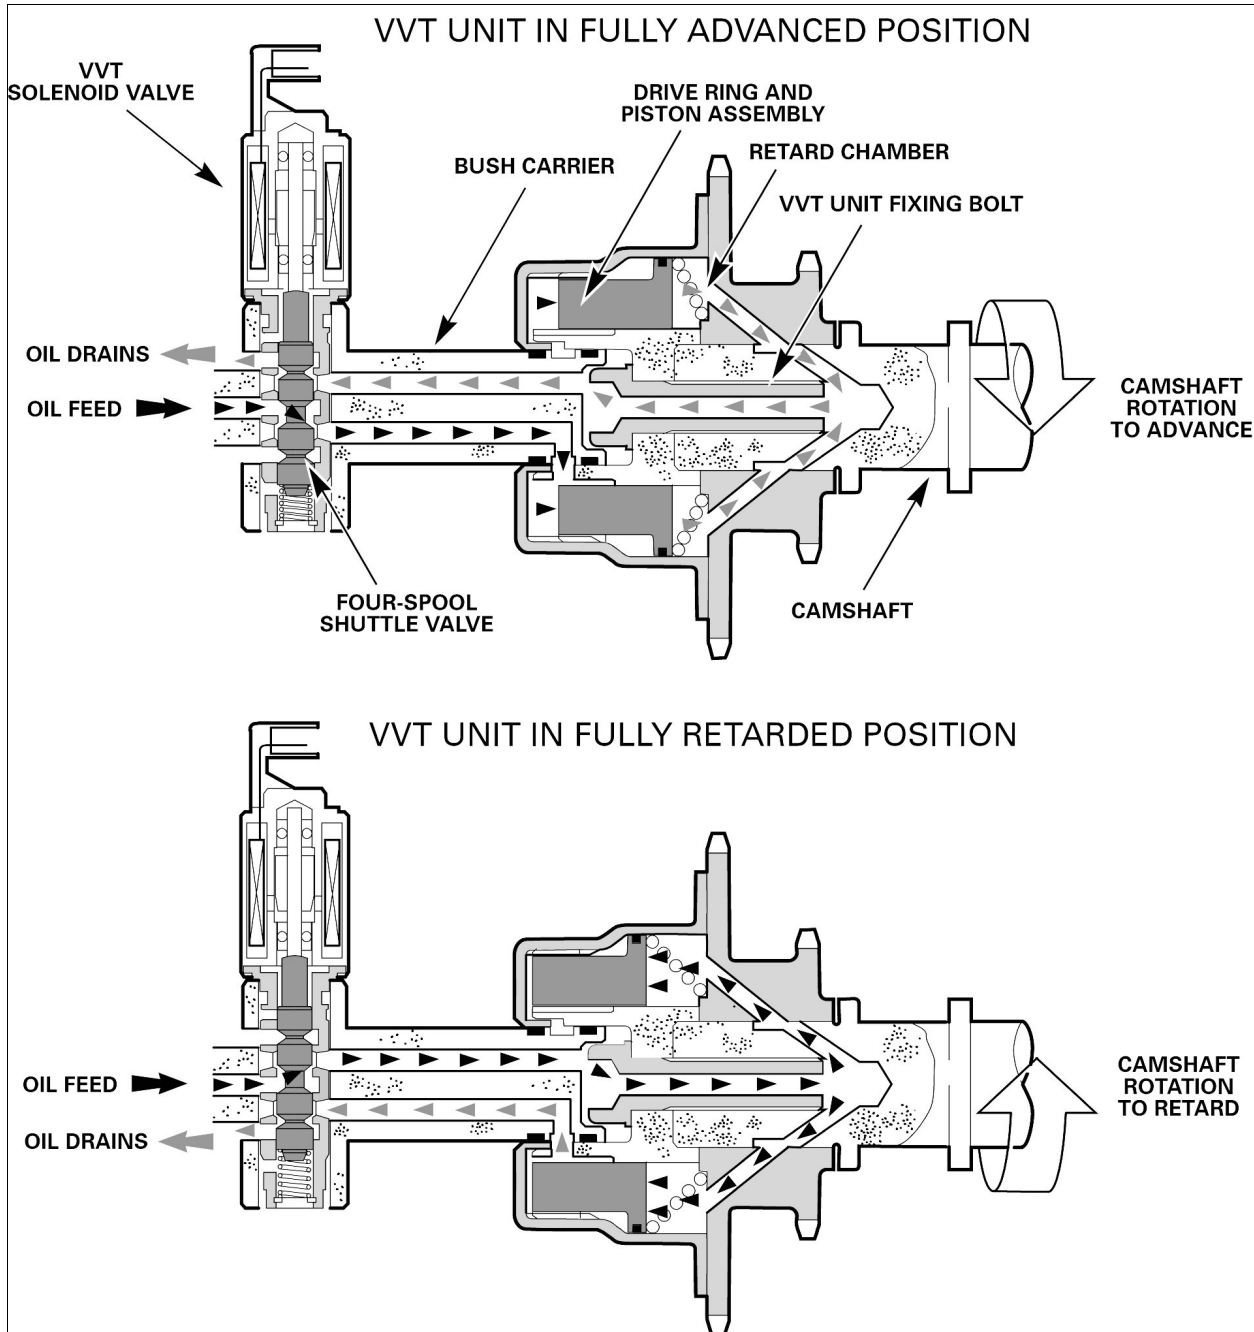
LINEAR VVT OIL CONTROL – AJ27
